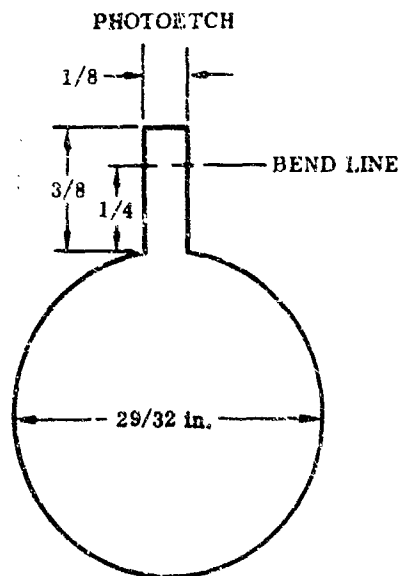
TEST SPECIMEN DESIGNS (Sheet 1 of 2)
